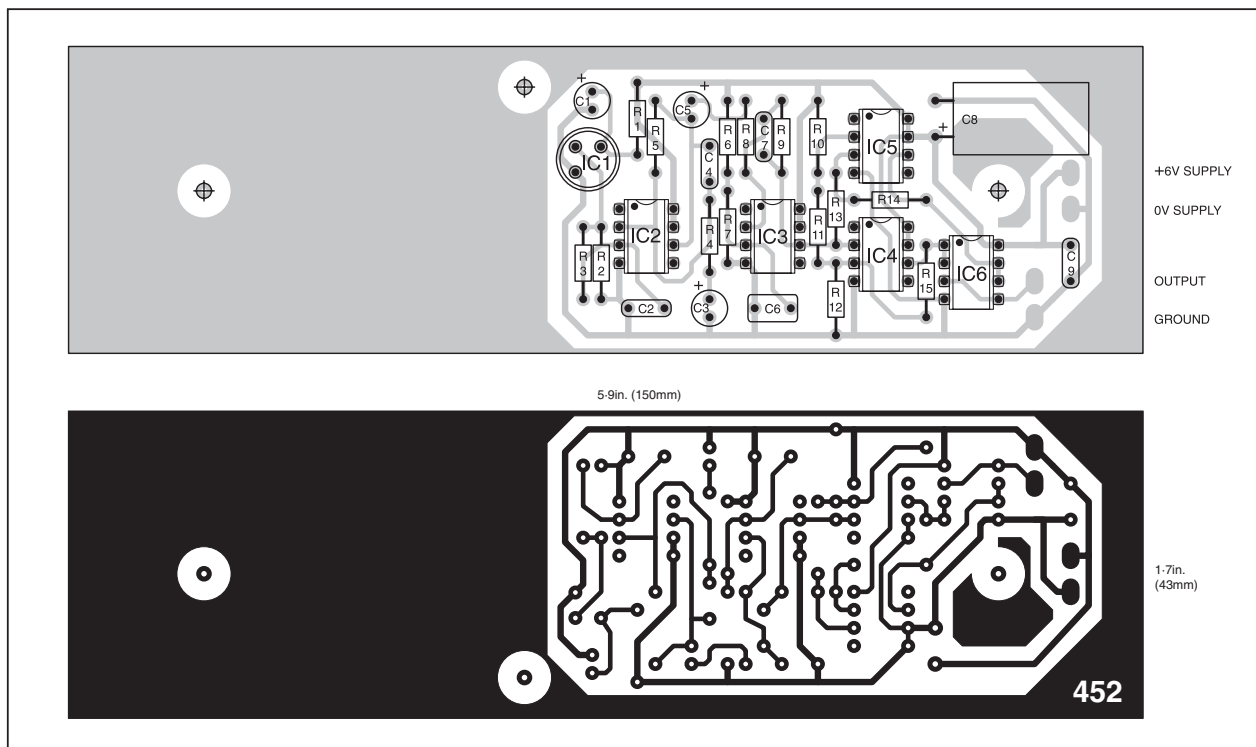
Printed circuit board component layout and full-size underside copper foil master for the Sensor section of the Portable Mini Alarm.
